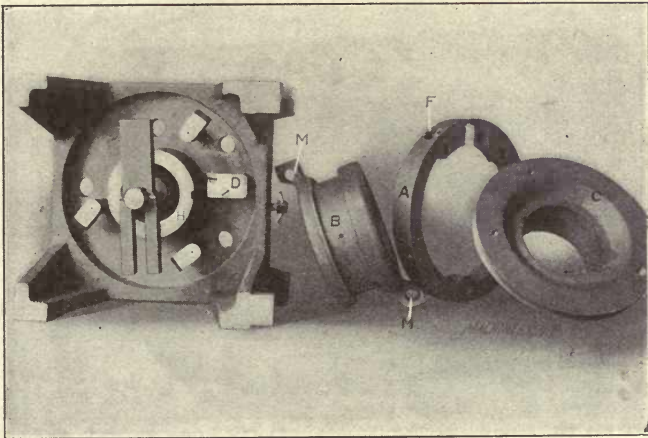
Drill Jig for Parts of Friction Clutches shown at the Right
